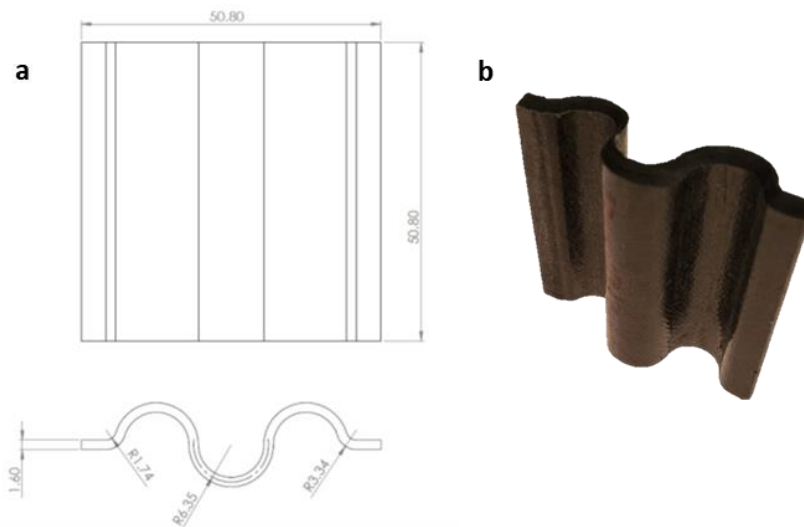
a) Feraboli crush geometry (sample dimensions in mm); b) ABS crush sample
